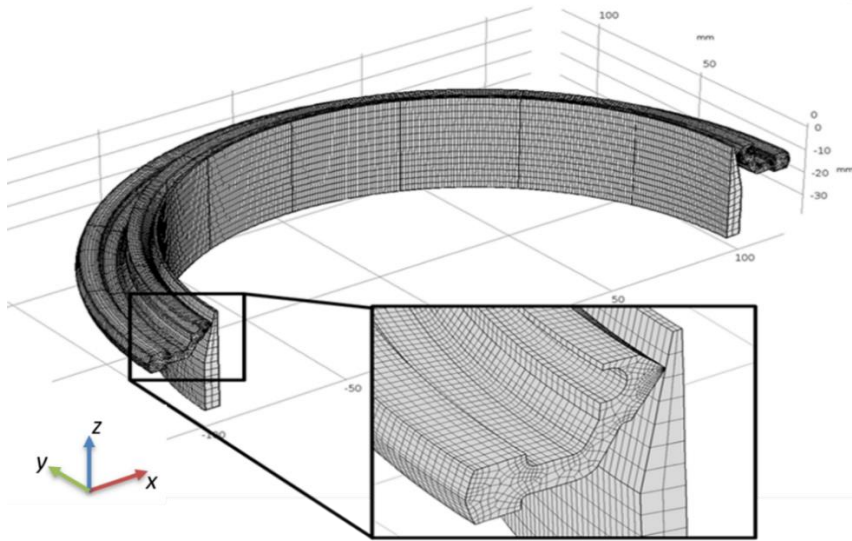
Three-dimensional model of the seal. Note the taper shaft part required for its concentric assembly.
